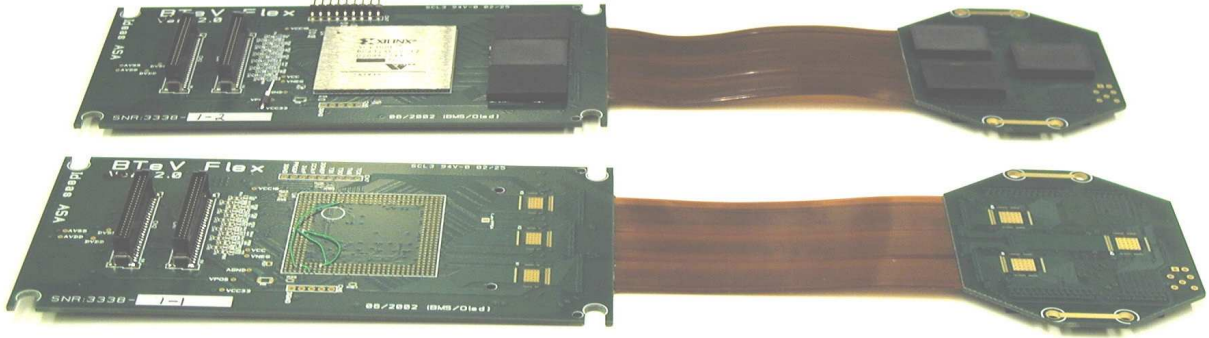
Photograph of the new flex hybrid board which will be used to read out an HPD.
